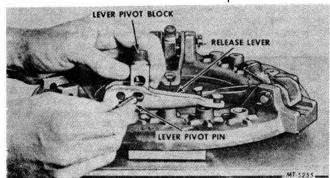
Disassembling Release Lever and Pivot Block Assembly
